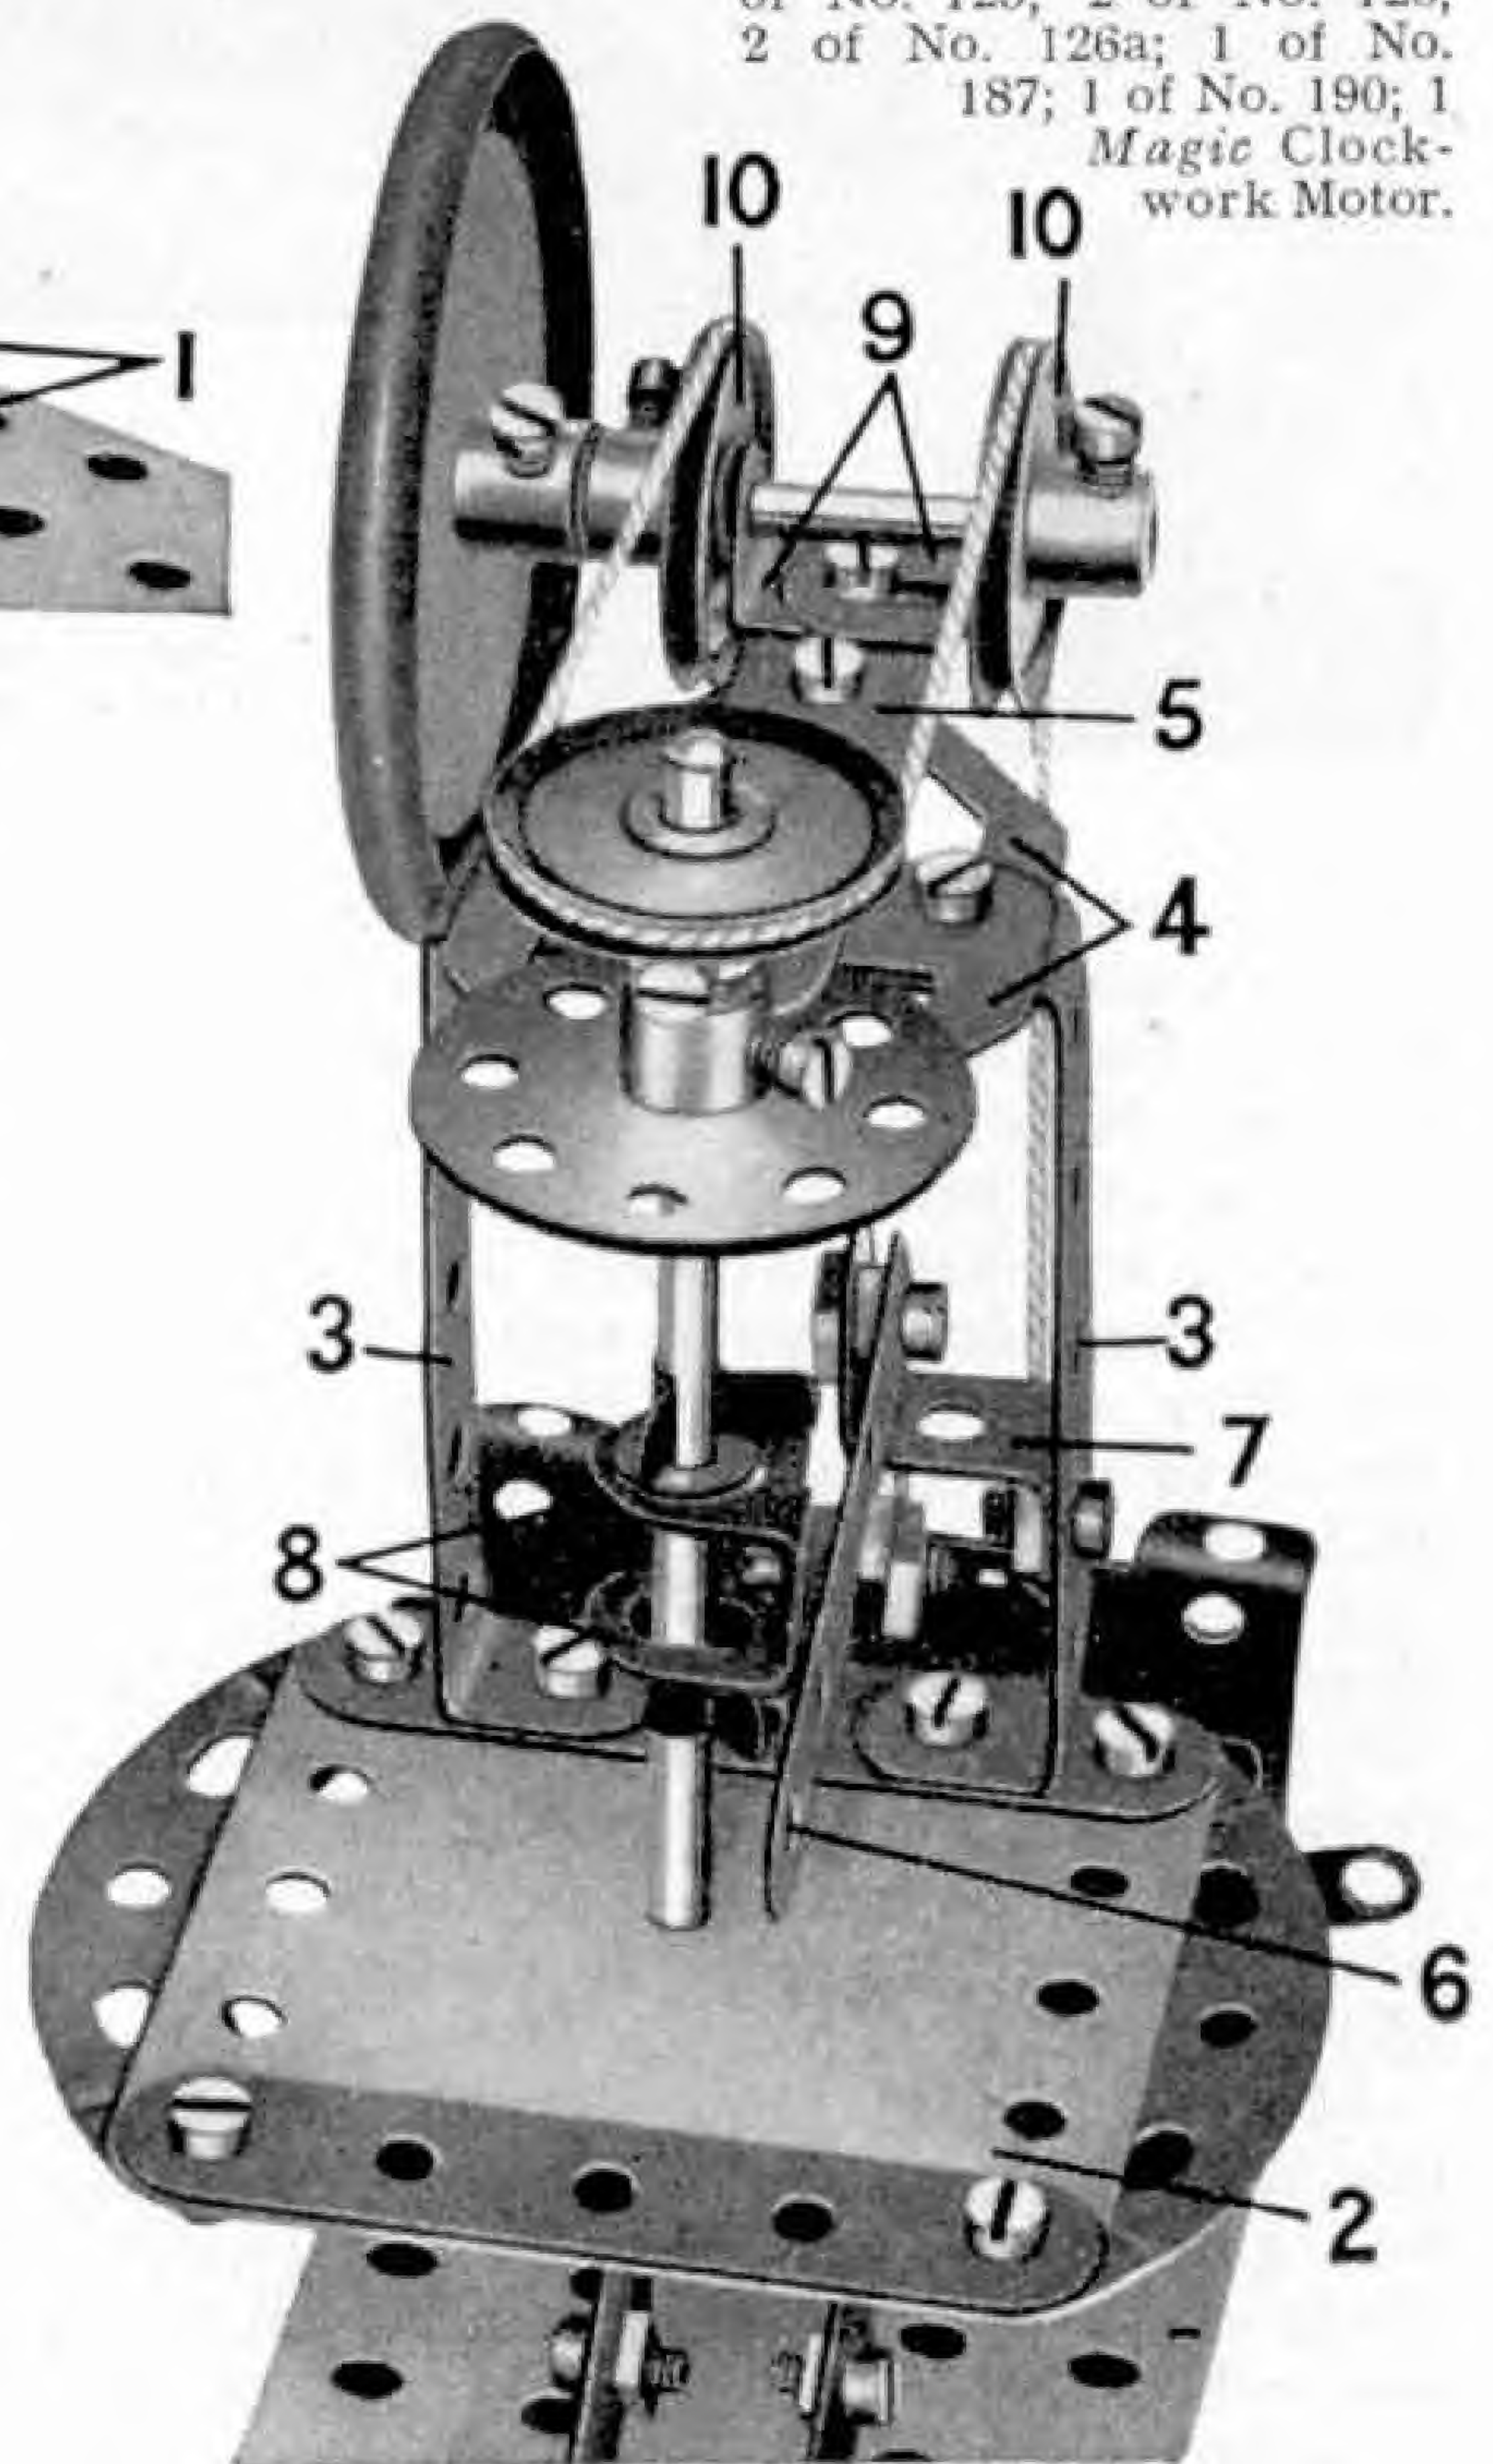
A close-up picture of the drill head, showing the arrangement of the belt drive and the method of pivoting the drill control lever.
